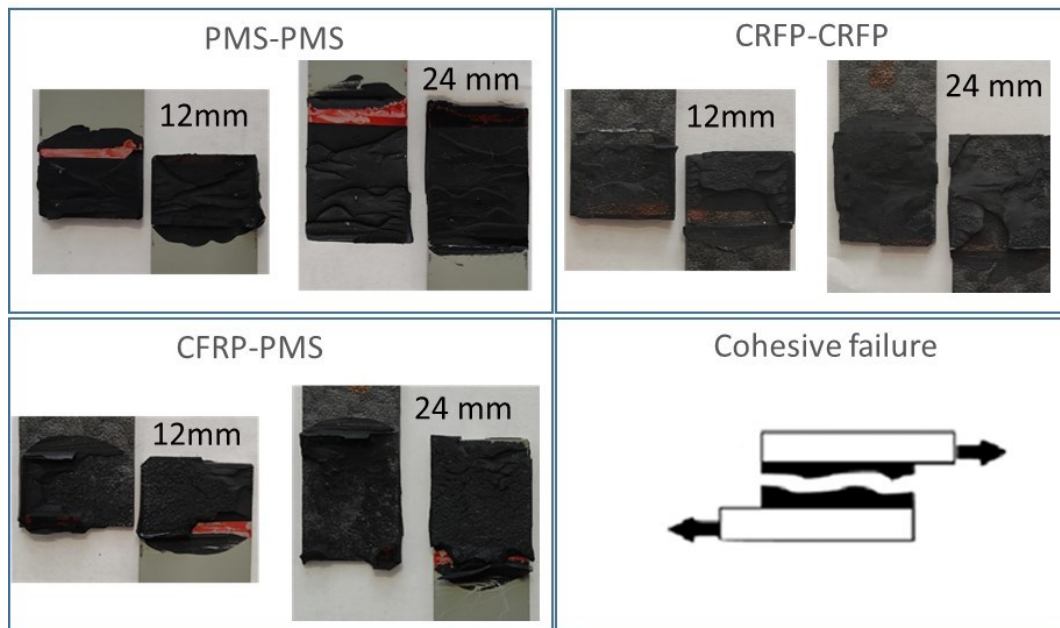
Representative fracture surfaces of the SLJ tests and representative cohesive failure
